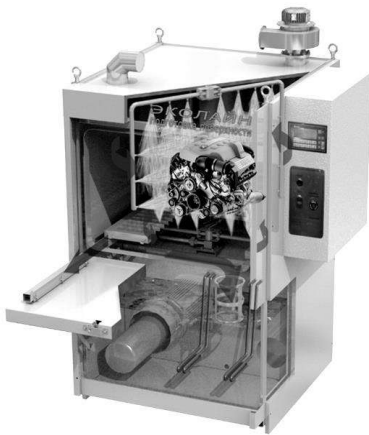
Chamber-deadlock jet washing machine MPP-250
